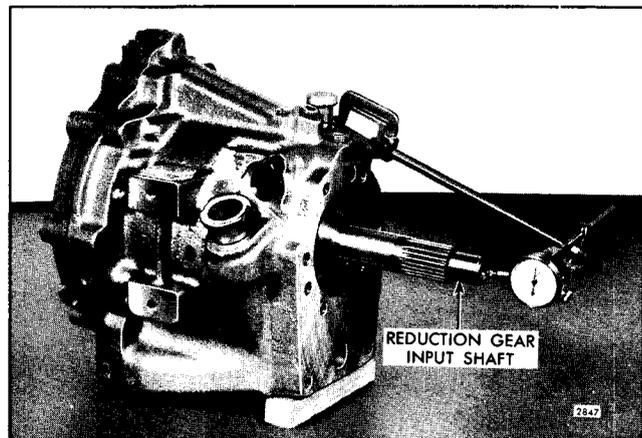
Checking Reduction Gear Input Shaft End Play
